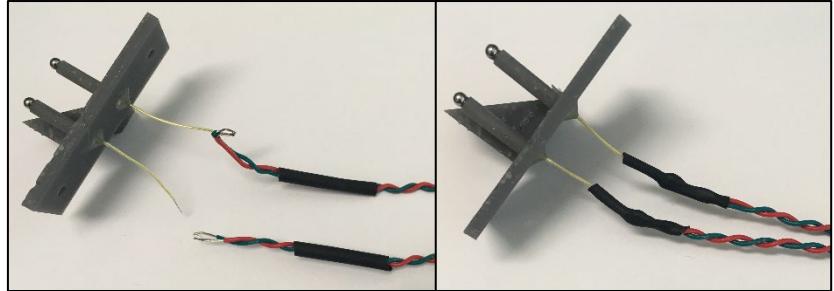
Soldering connecting wires to the electrode leads. Left, one pair of connecting wires is soldered on. Right, both pairs soldered with heatshrink tubing applied.
